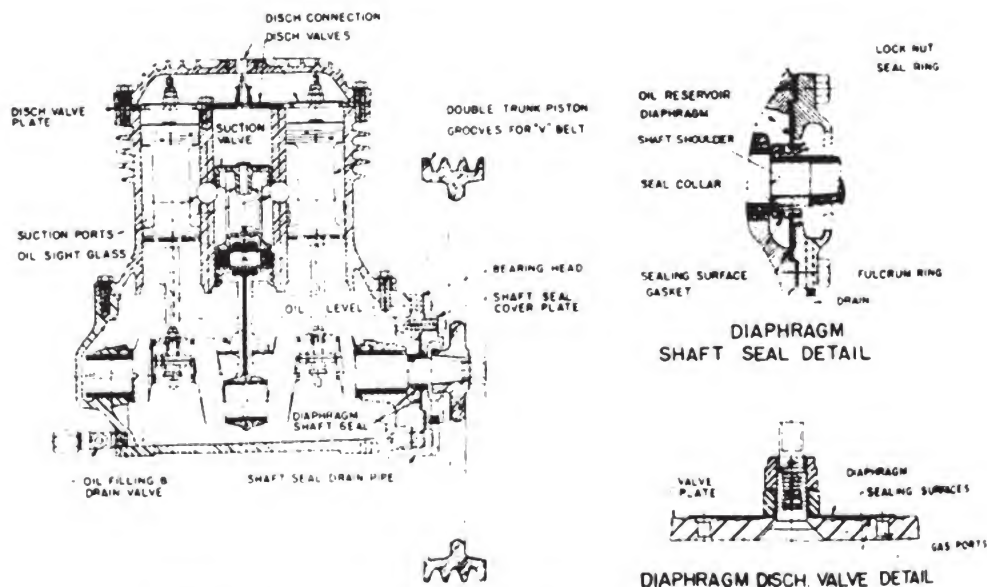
Cross-sectional view of a diaphragm seal.
